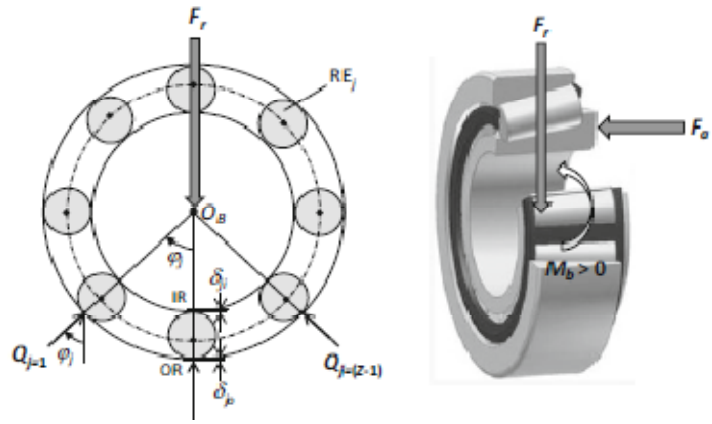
2 Loads and Bending Moment on taper roller bearing
